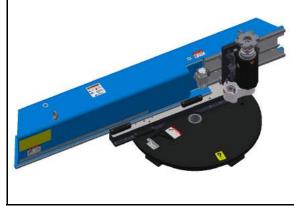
OD MOUNT ROTARY TABLE AND ARM ASSEMBLY
